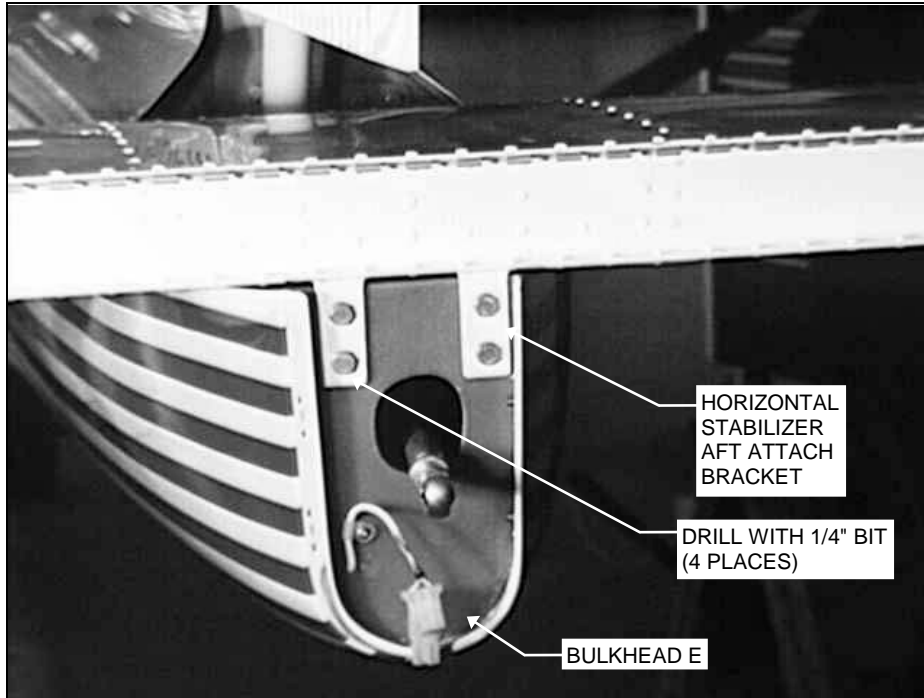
Drilling the Horizontal Stabilizer Aft Attach Bracket Bolt Holes
